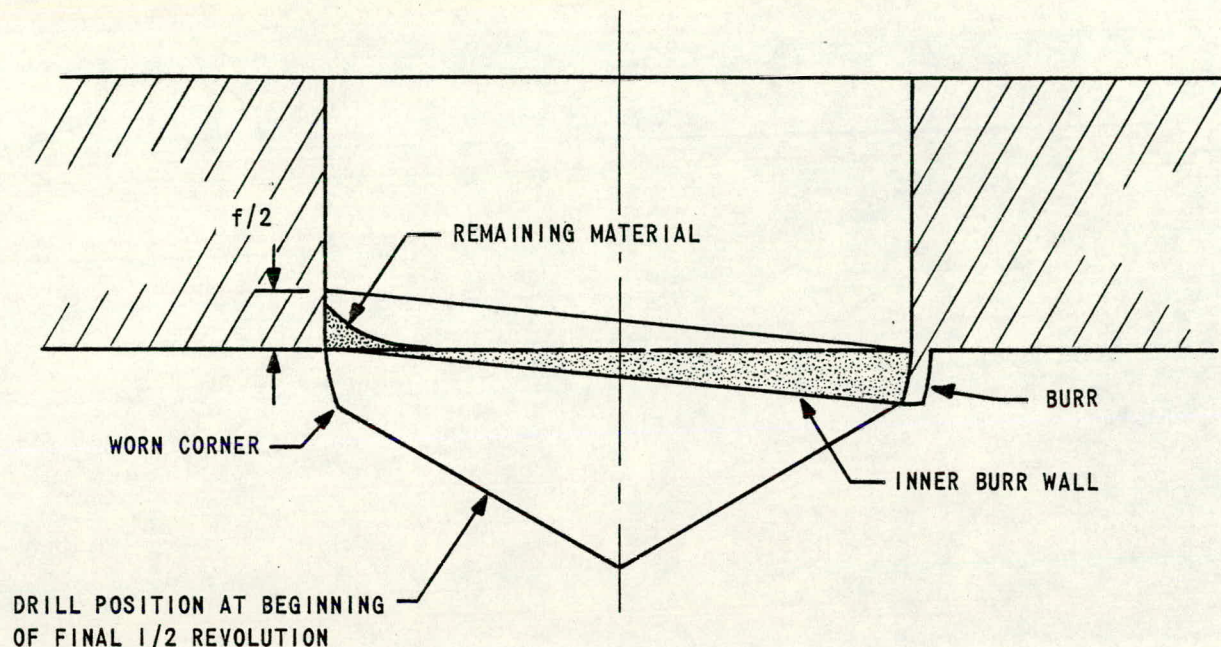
Material Left in Hole and Burr Produced When Worn Corner Exits From Workpiece
